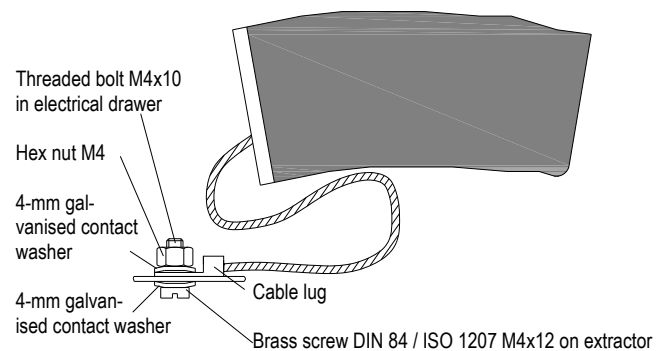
Shielding in the electrical drawer and on the extractor with ribbon cable
